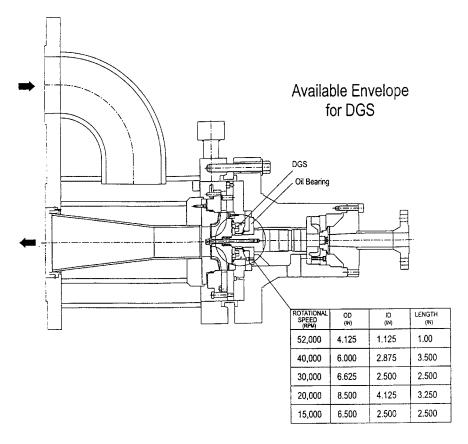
Cross-section of turboexpander oil brake with oil bearing and DFS.
